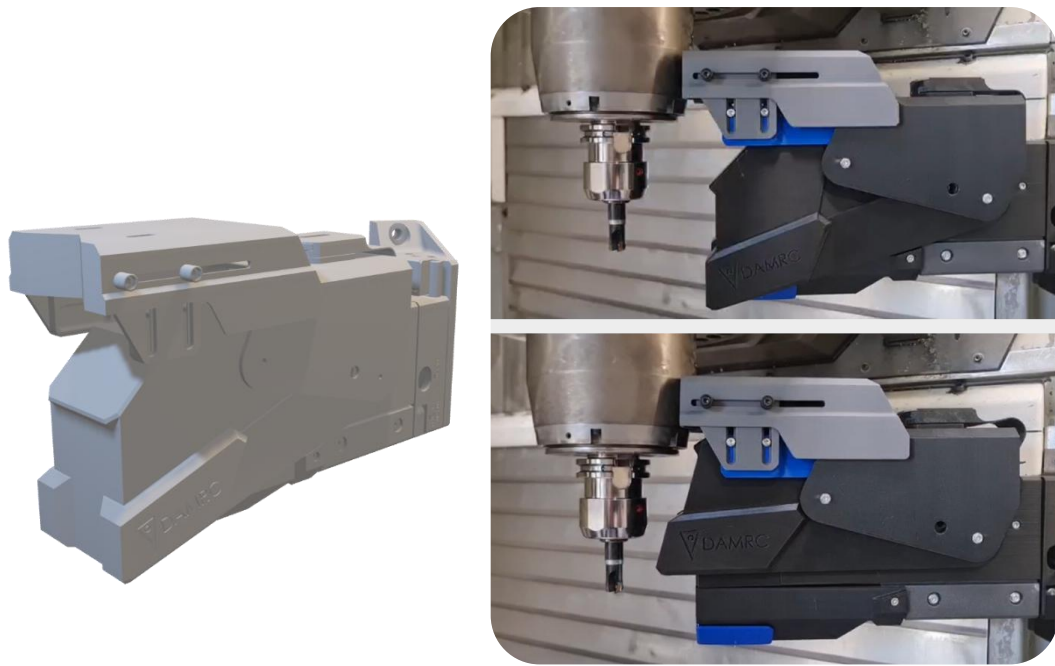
3D Microscope enclosure 3D model (left), spindle approaching the hatch lever (upper right), spindle acting on the microscope enclosure hatch (bottom right)
